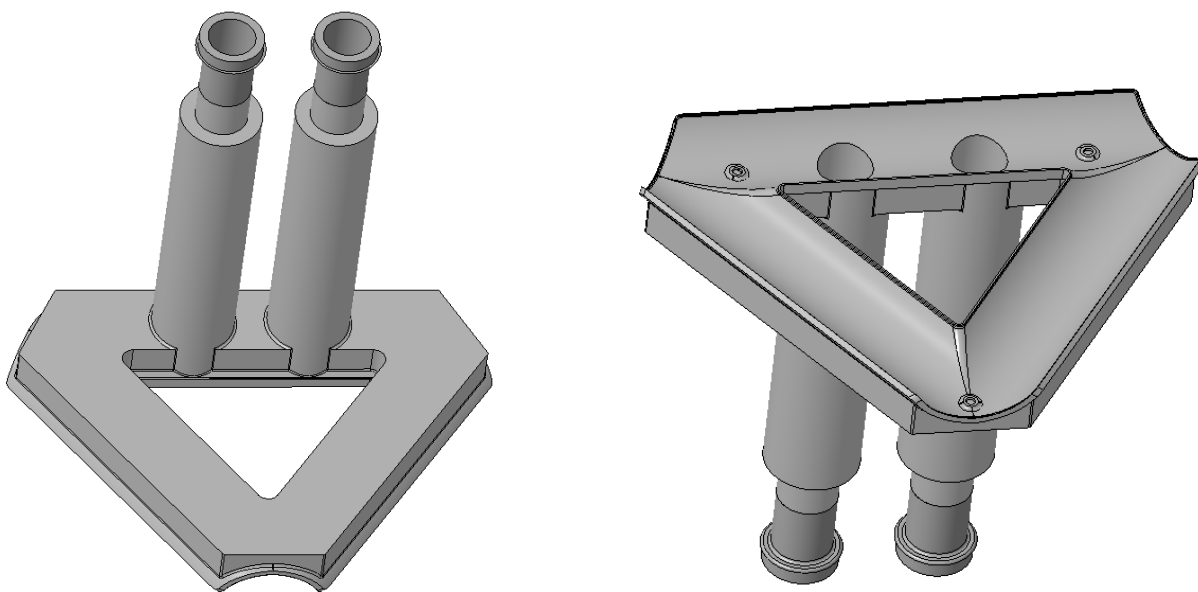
Tube Vacuum Vessel Cap machined from Al 6061-T6 forging after friction welding of 316L vacuum tube extensions
